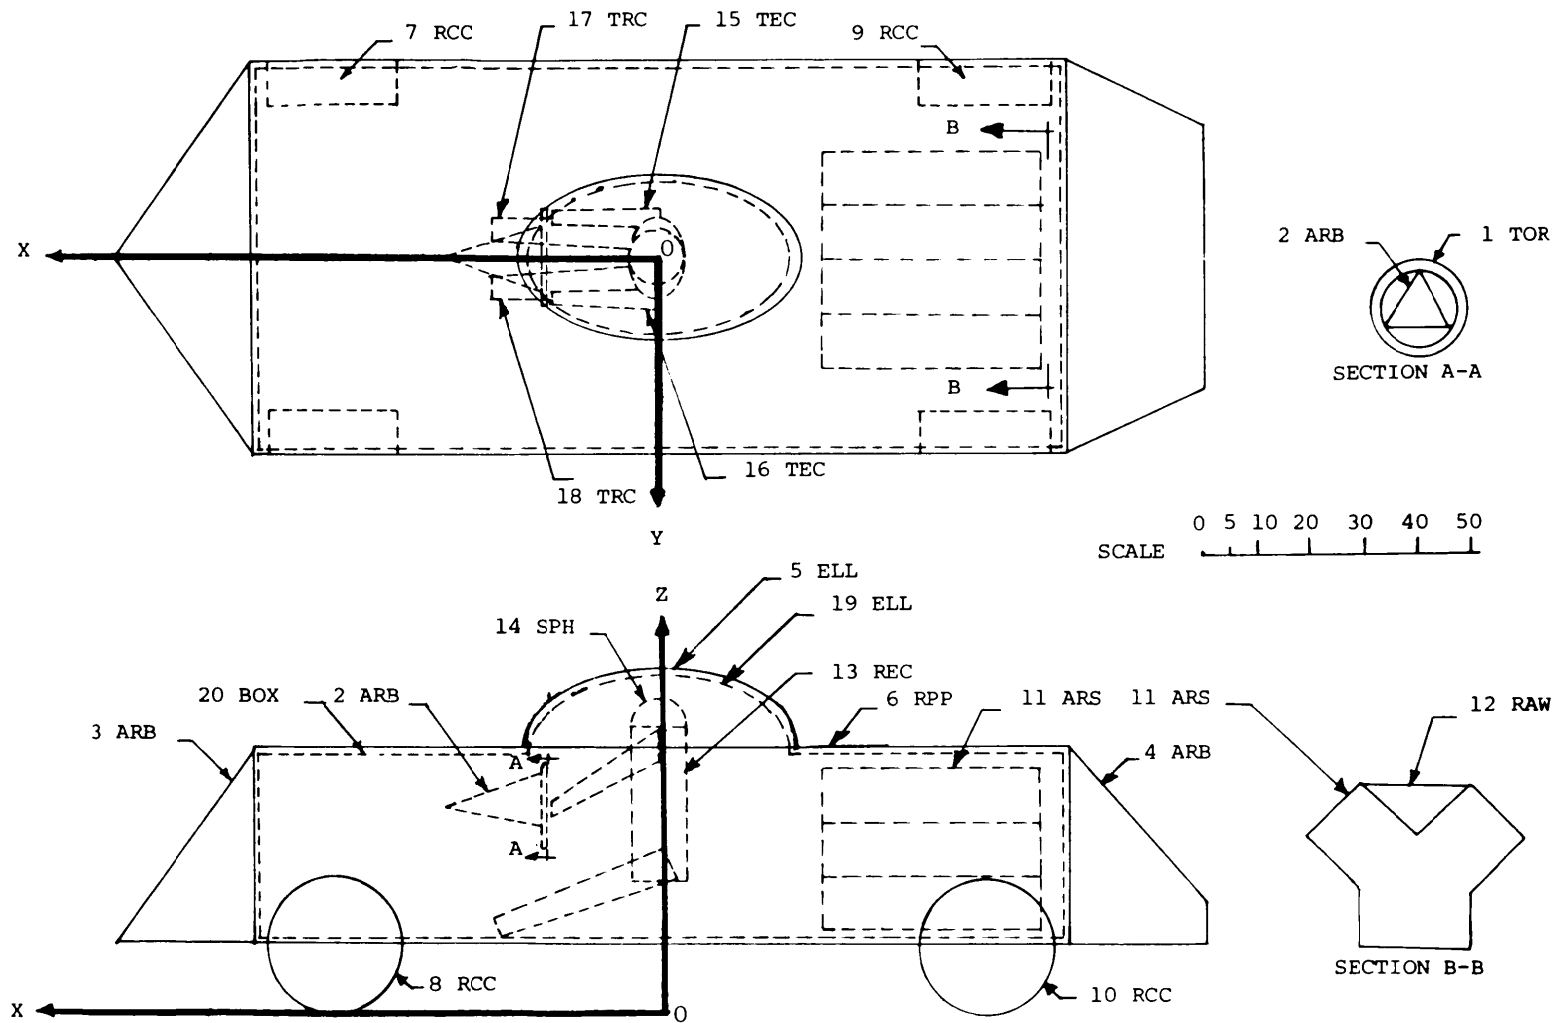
X,Y,Z Coordinates Superimposed Over the Engineering Drawings of a Sample Target
